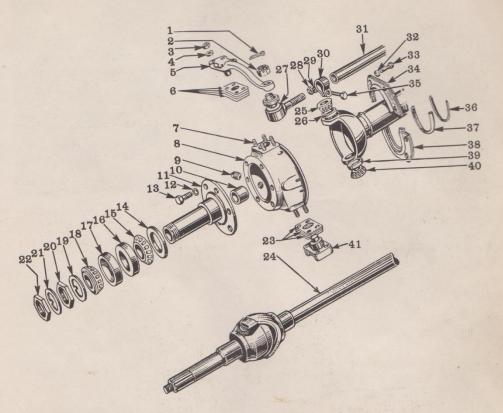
FRONT AXLE, STEERING KNUCKLE AND WHEEL BEARINGS
